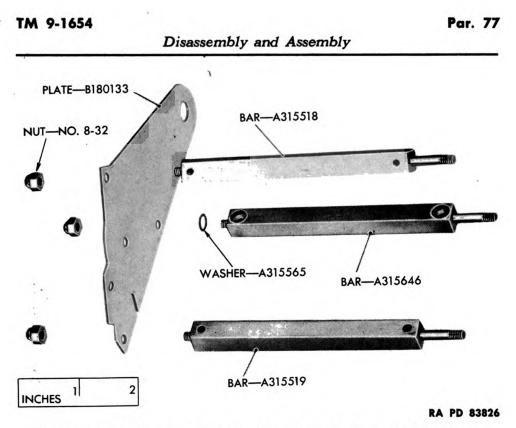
Side Plate Spacing Bars Exploded From Right Paper Transport Mechanism Plate
